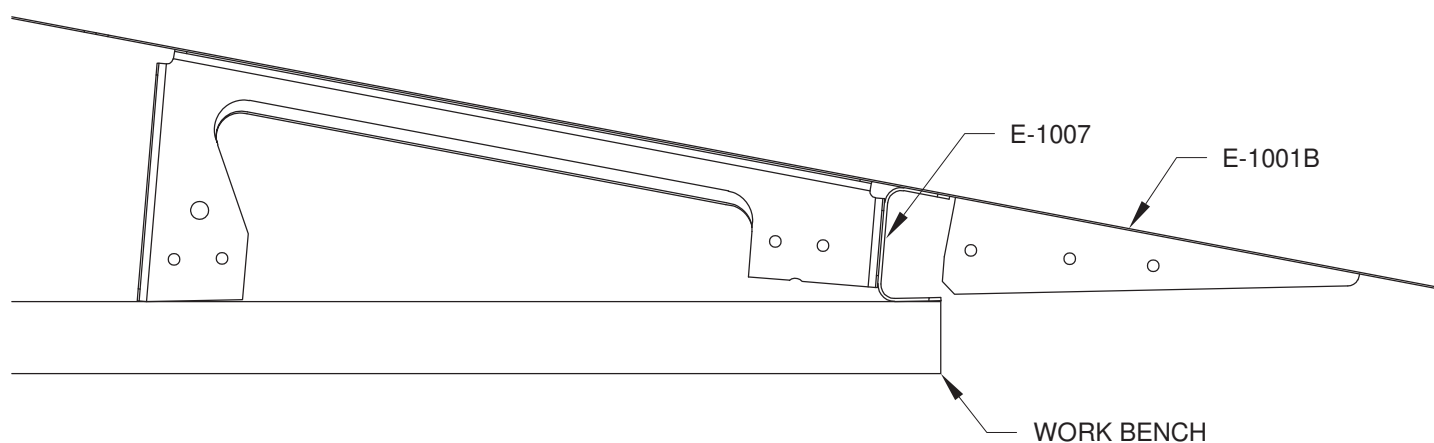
RIVETING THE RIGHT ELEVATOR REAR SPAR TO SKIN
